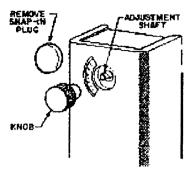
Drawing showing snap-in plug removed and the knob in line to assemble. Press the knob onto the slotted shaft.
